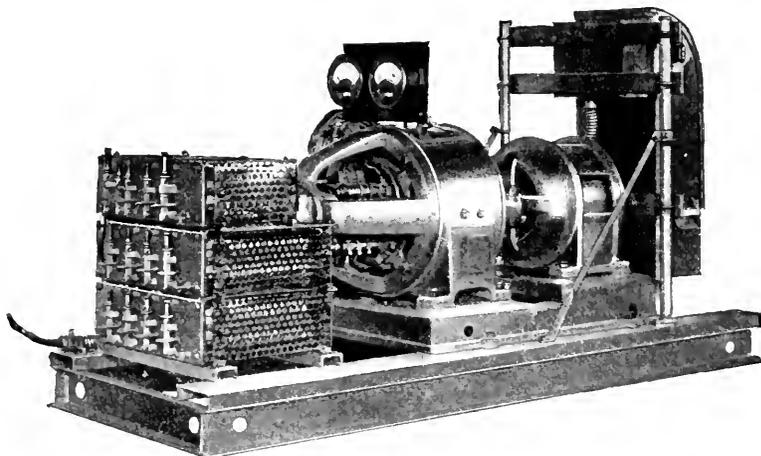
400-amp. Constant-potential Arc-welding Set
